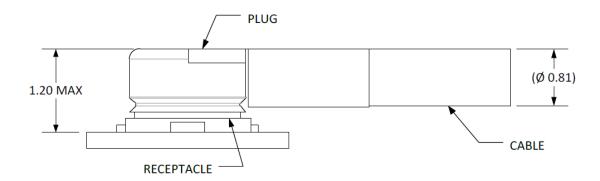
Connection between RF Connector and Mating Plug Using Ø0.81mm Coaxial Cable
